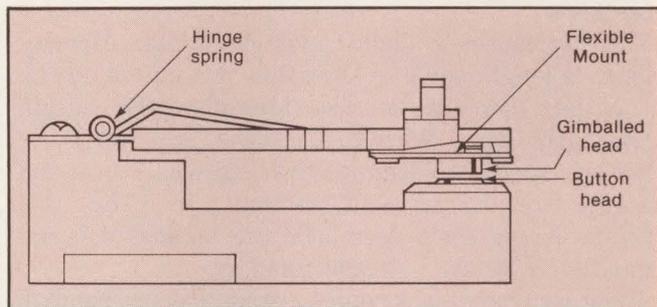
The magnetic head assembly for double-sided minifloppy drives now uses gimballed head above, flat-surfaced button head below. This asymmetric design eliminates the excessive diskette wear that resulted from the previous design, in which both heads were gimballed.
